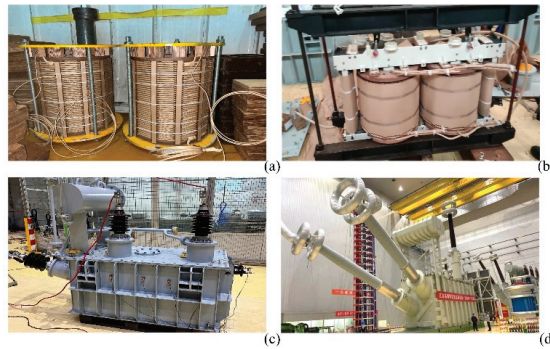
Prototype preparation and vibration characteristics testing: (a) Winding preparation; (b) Assembly of iron core winding; (c) Complete prototype appearance; (d) Refer to converter transformer.
